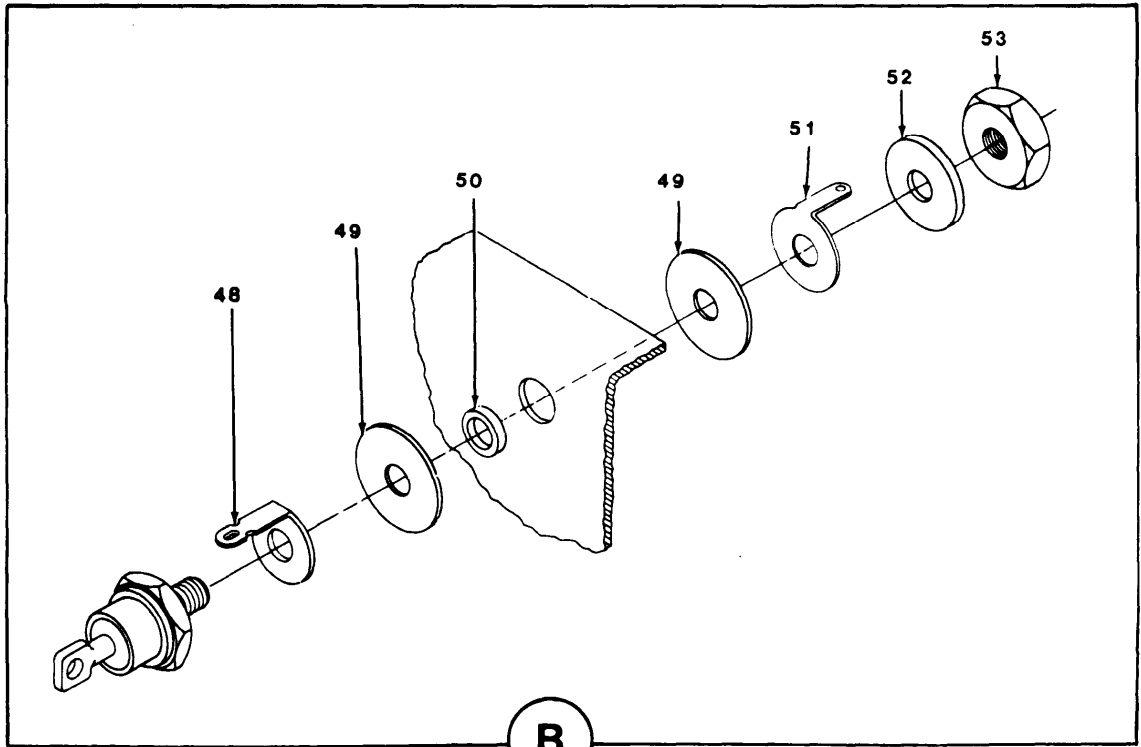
Heatsink Assembly (Sheet 2 of 3).
